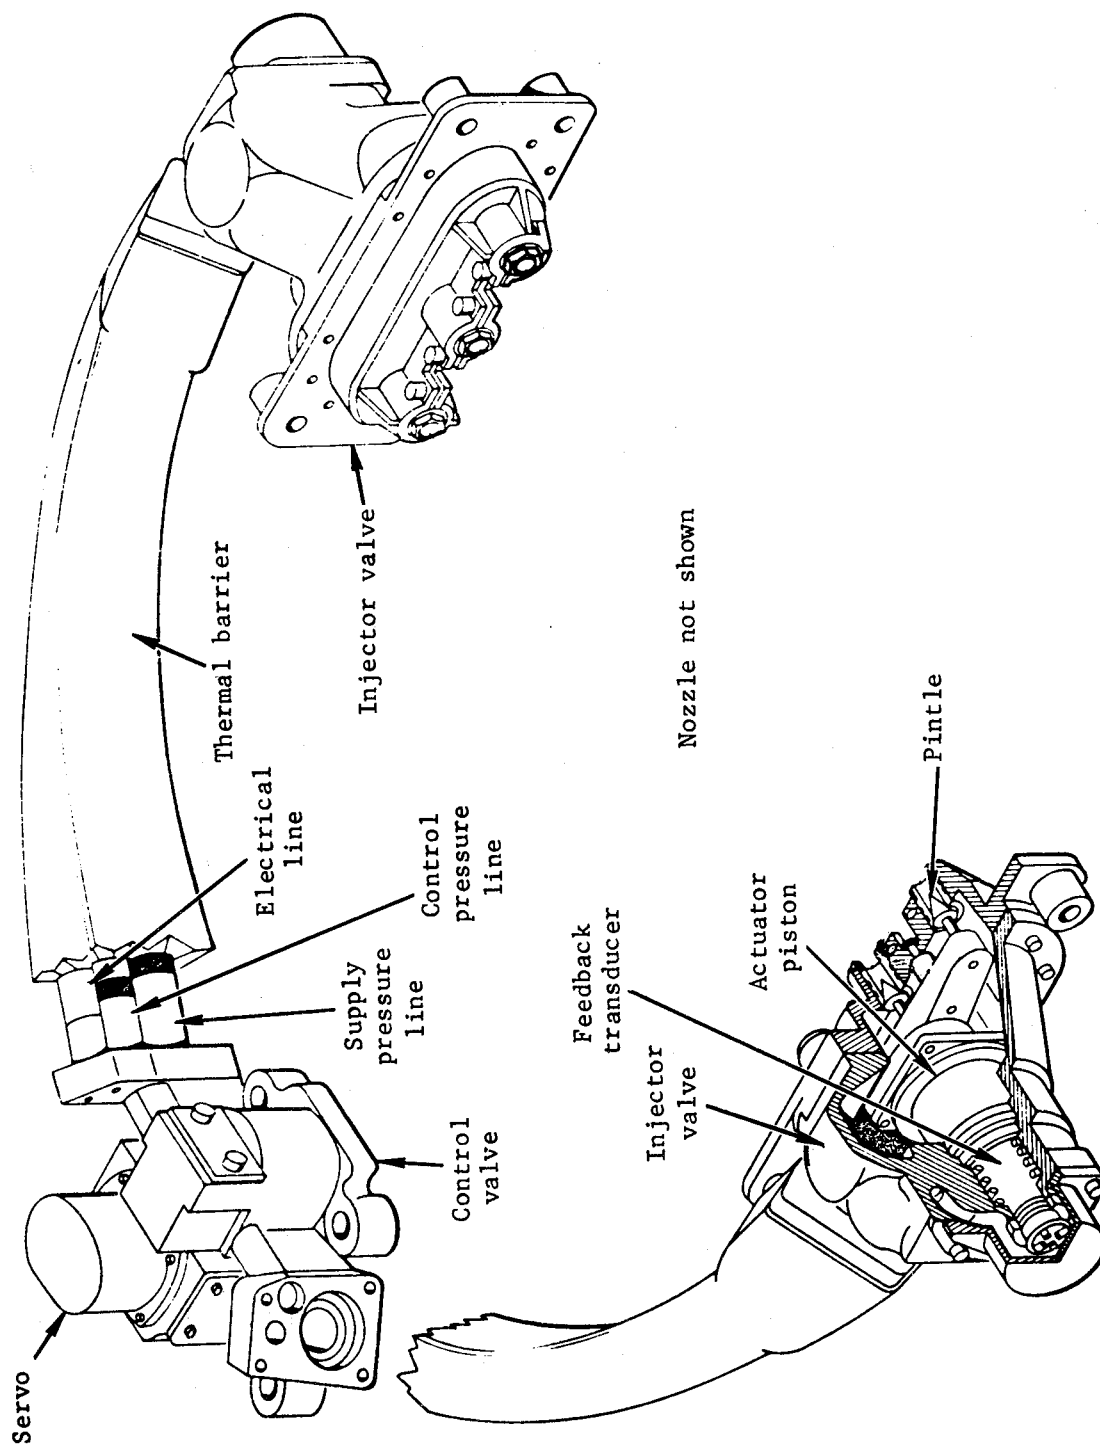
Injector valve assembly with hydraulic-powered actuator.
